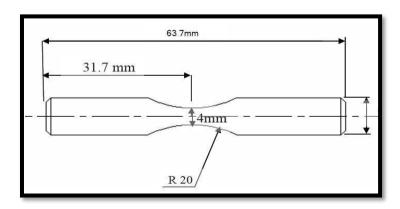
a): Dimensions of fatigue specimens tested. (ASTM D1043-02)
